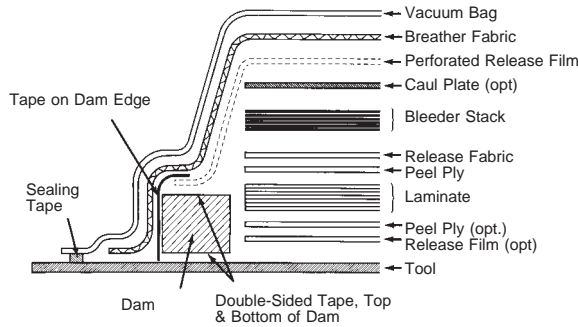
Vacuum Bag Materials for Complex Part [Marshall, Composite Basics]
